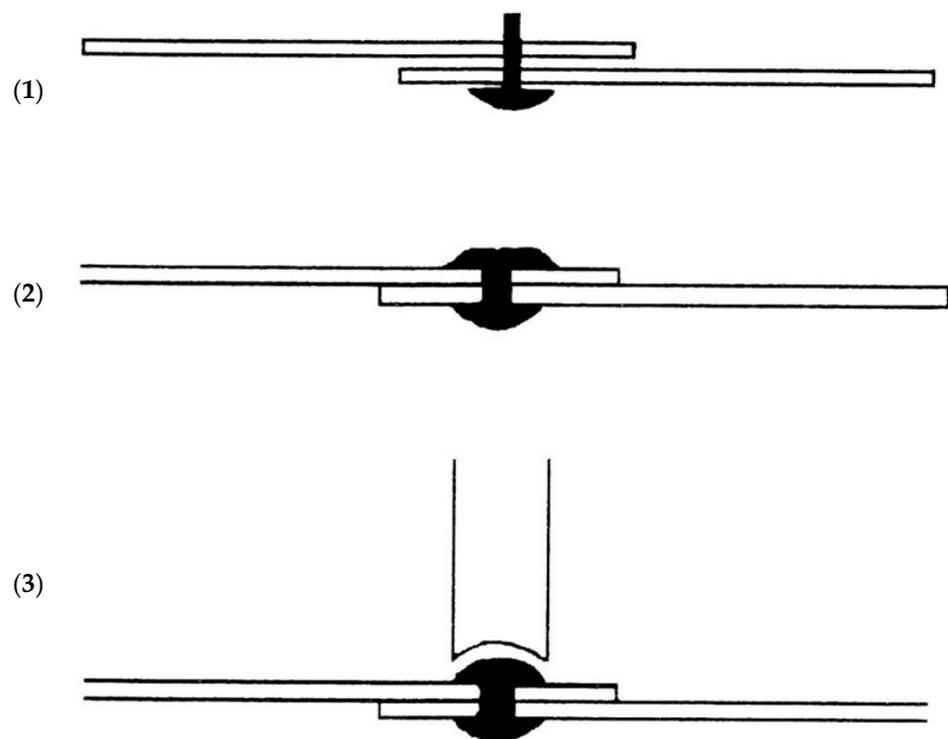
Rivets; two overlapping sheets. (1) Rivet pin with head; (2) deformation of second rivet head; (3) rounded rivet head and hollow punch (after [Hodges 1964](#), Fig. 13).
